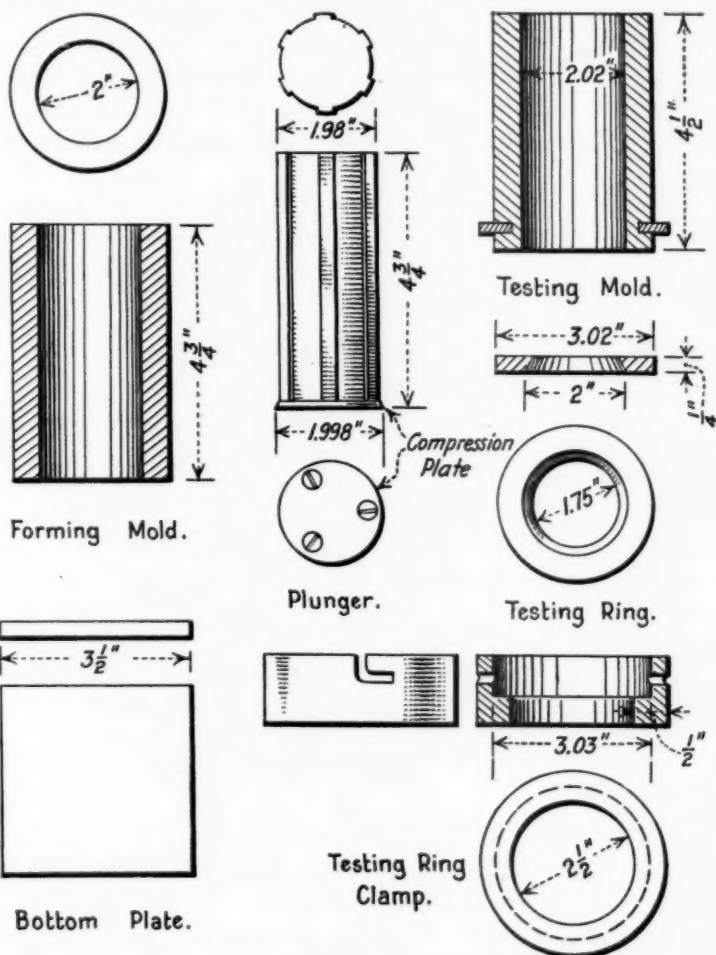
Details of Forming and Testing Molds, Plunger, Testing Ring and Ring Clamp.
